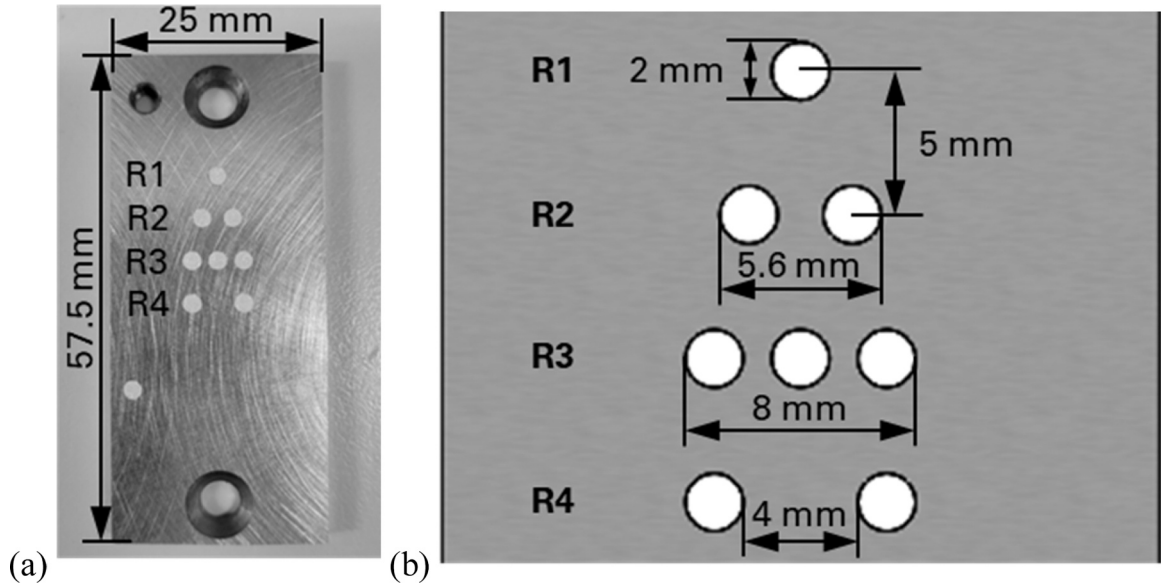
(a) Image of a calibration sample (b) Size and arrangement of inserts.
